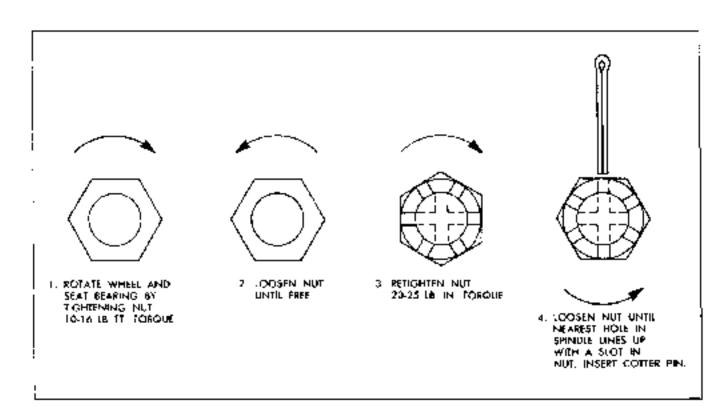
Charking Front Wheat Bearing Adjustment
